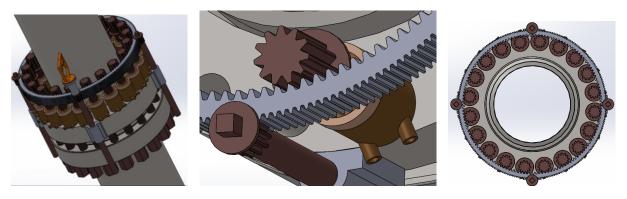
Gear ring system Figure 27: Gear ring system in assembled position Figure 28: System seen from above
